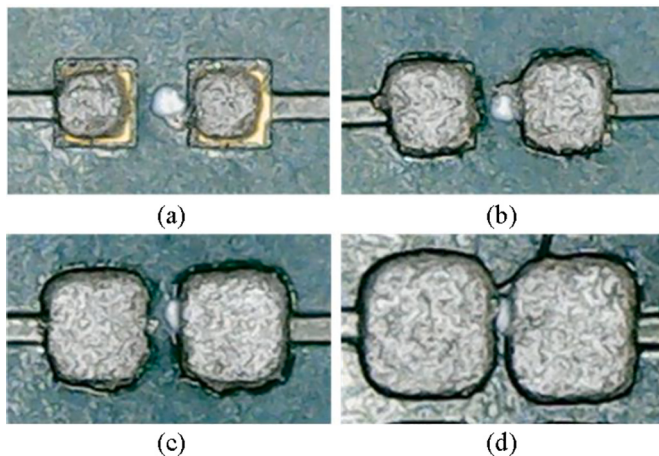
Printed solder pastes of shape variations (a) concave (b) straight (c) tiny convex (d) convex.
